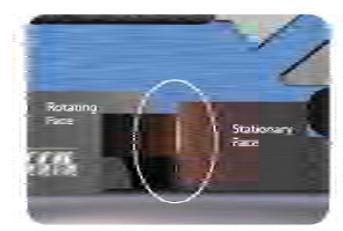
Mechanical seal faces with a fluid film of fresh, clean water will run cooler and longer
